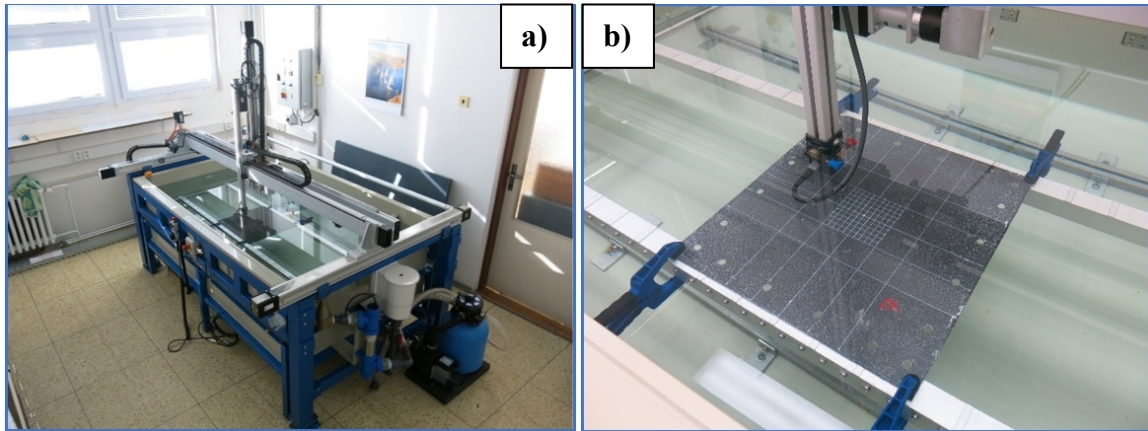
Ultrasonic test NDI equipment: a) Immersion tank + automated 3-axis scanner system, b) clamping fixture
